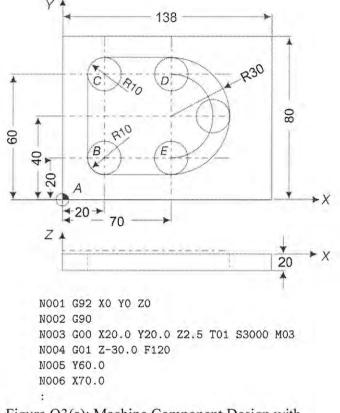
(c): Machine Component Design with Partial CNC Part Programming Coding
